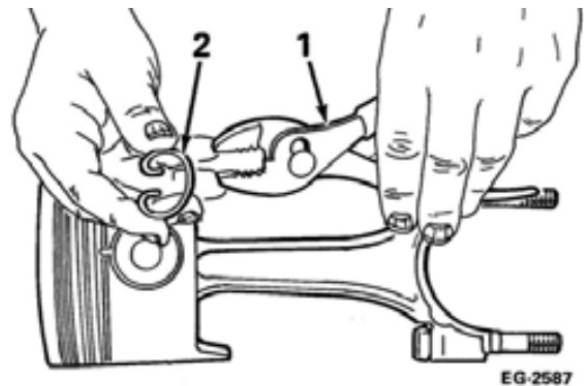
Removing the Piston Retaining Ring (New Style Connecting Rod Shown)
